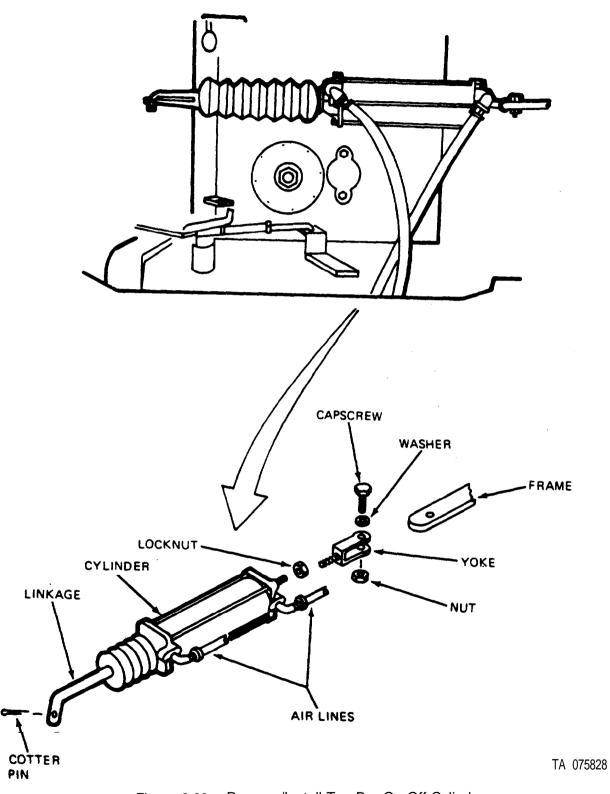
Remove/Install Top Bar On-Off Cylinder.
